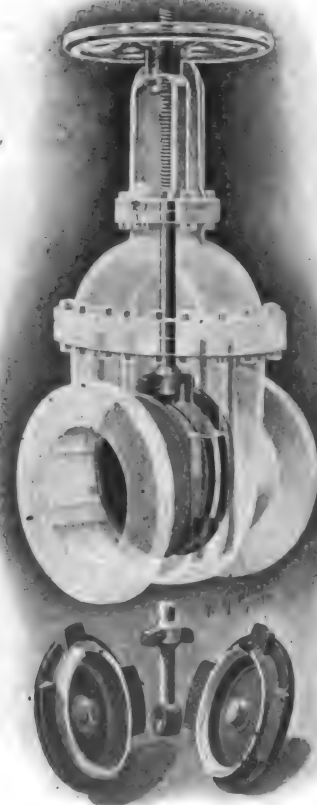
ADJUSTABLE WEDGE GATE VALVE.
